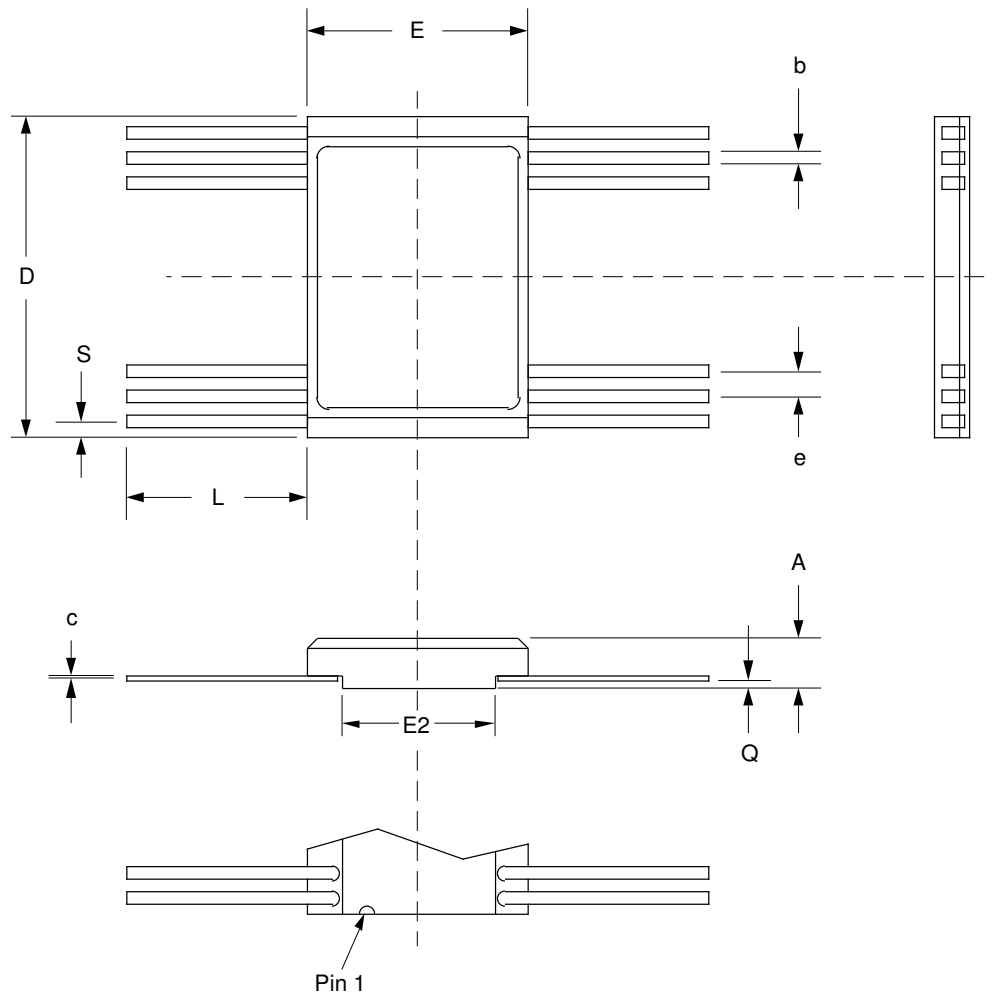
28-Lead Dual Flatpack (Solder Seal) - Package Style C
